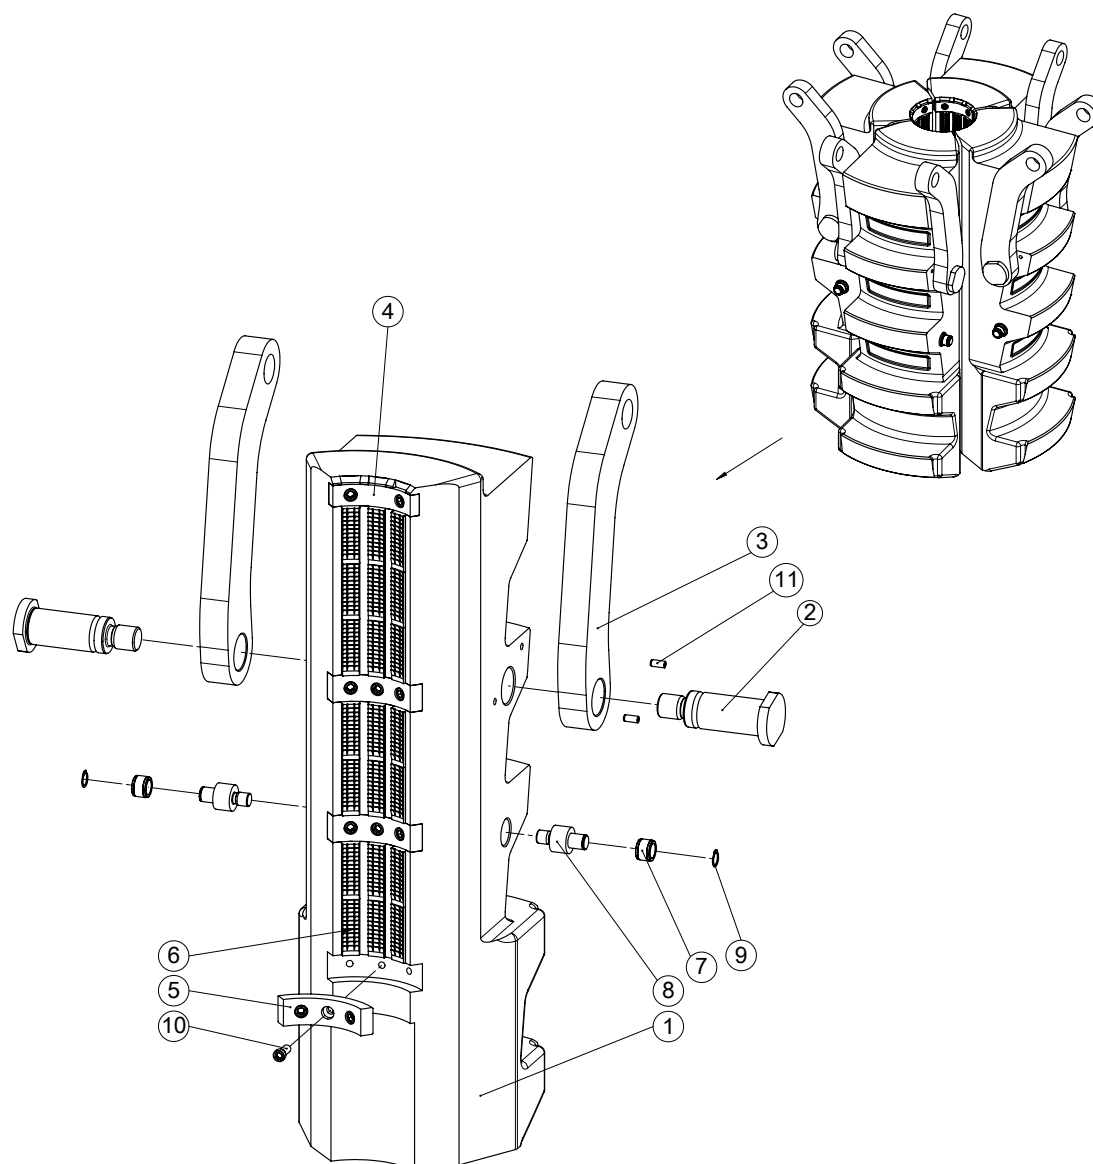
774060-112* Insert Slip Assembly Landing String
